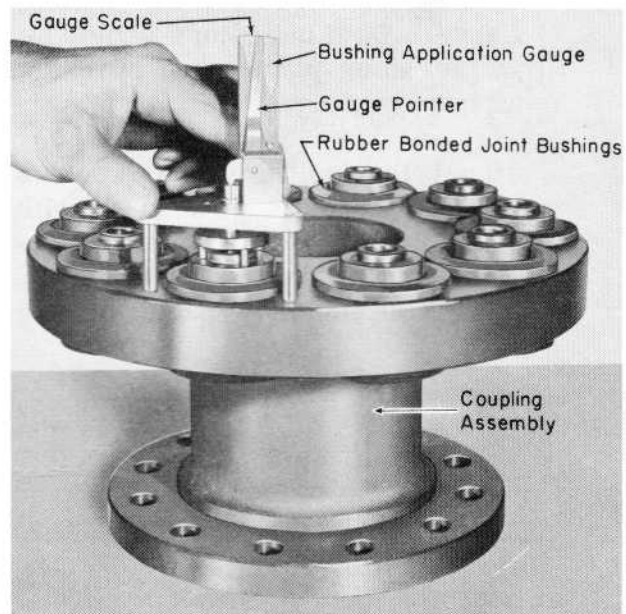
Bonded Joint Bushing Gauge 8254465 Application
